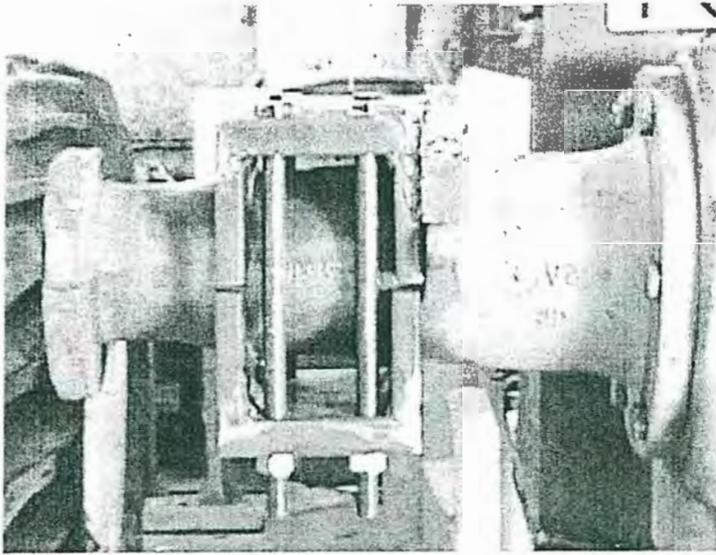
ROPS axle housing mount for Allis Chalmers D17.
